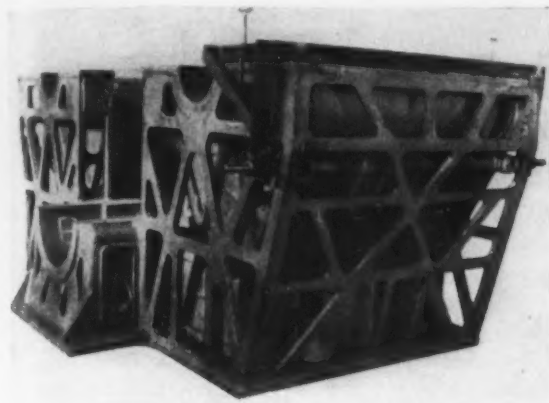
This complex center section weldment for a large marine gear drive contains both steel castings and steel plate.
